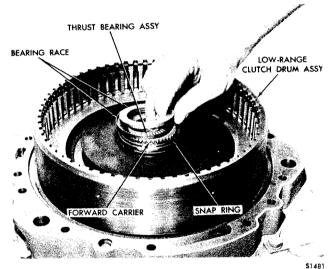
Installing needle roller thrust bearing assembly (-3 overdrive model)
